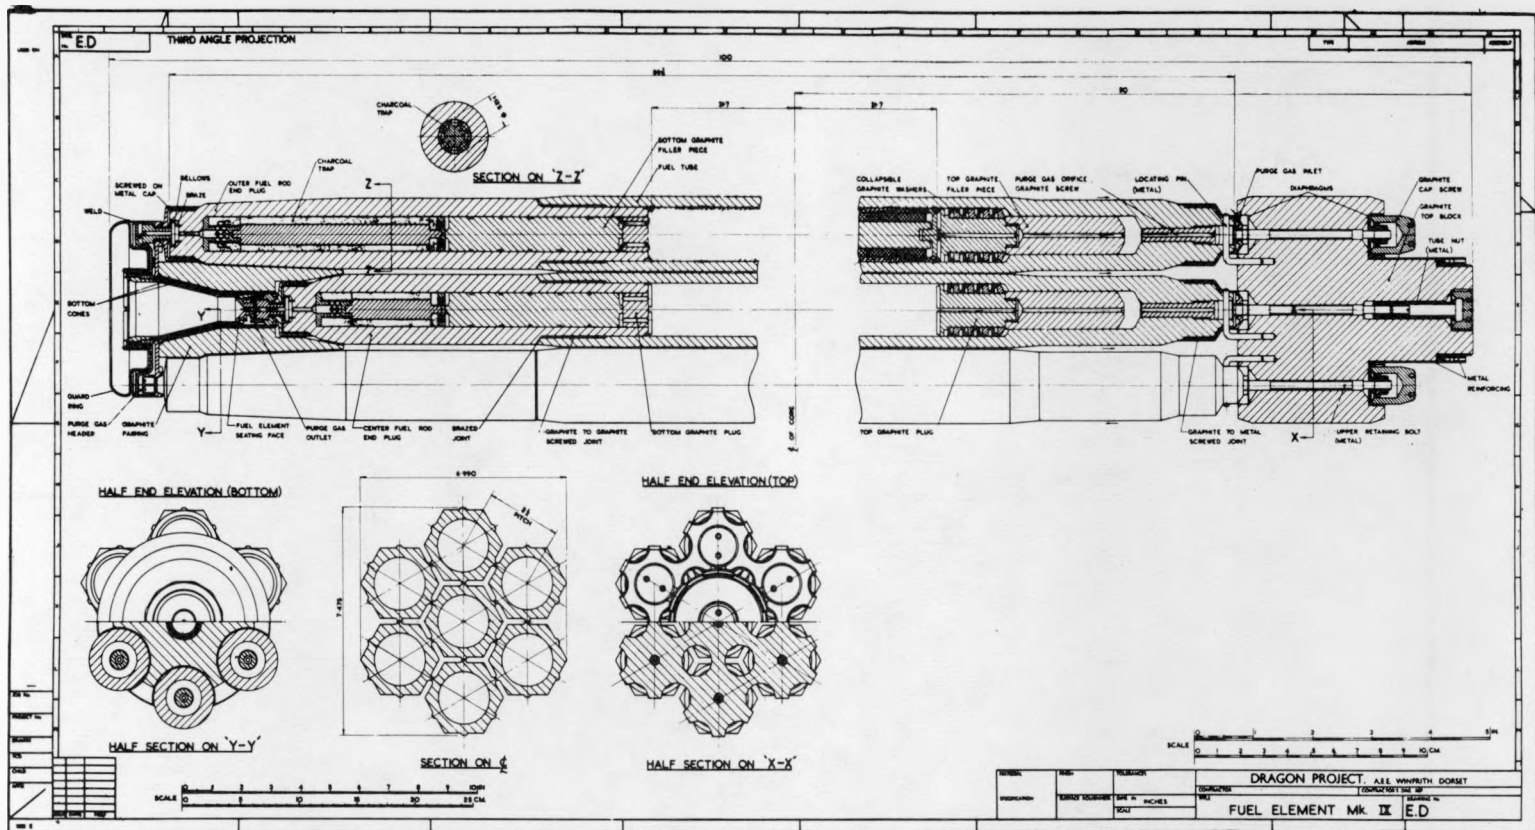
DRAGON FUEL ELEMENT ASSEMBLY MARK IX
